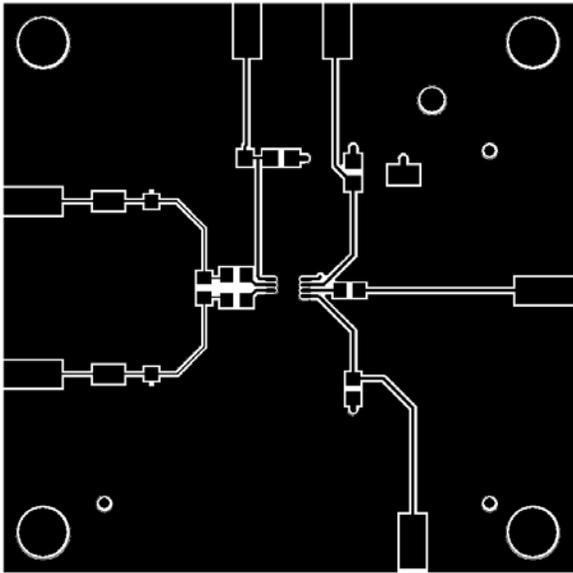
ADA4830-1BCP-EBZ Board Layout Pattern, Primary Side
